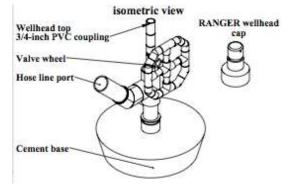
Ranger Class Wellhead, Wellhead base, Wellhead top, and Wellhead cap isometric CAD drawing.
